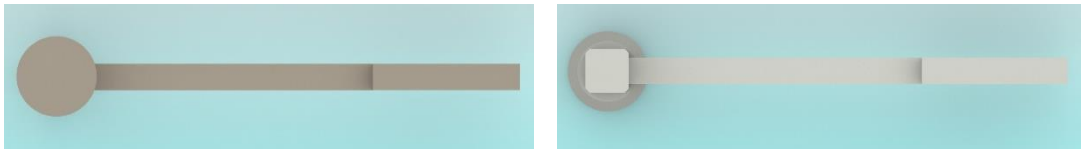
Left: top view of screw element. Right: bottom view of screw element.
